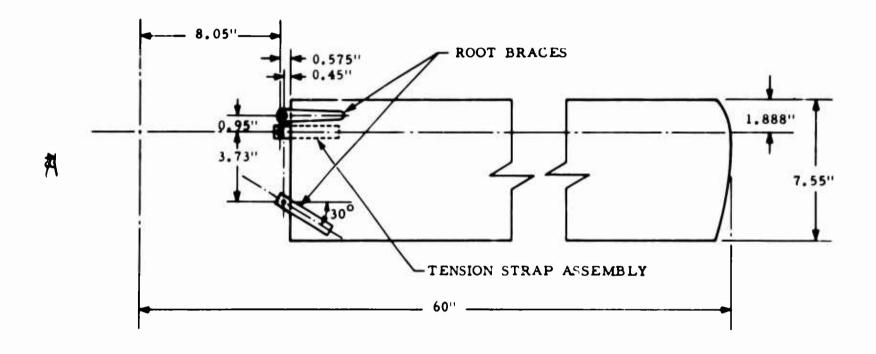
BLADE AND BLADE ATTACHMENT GEOMETRY
